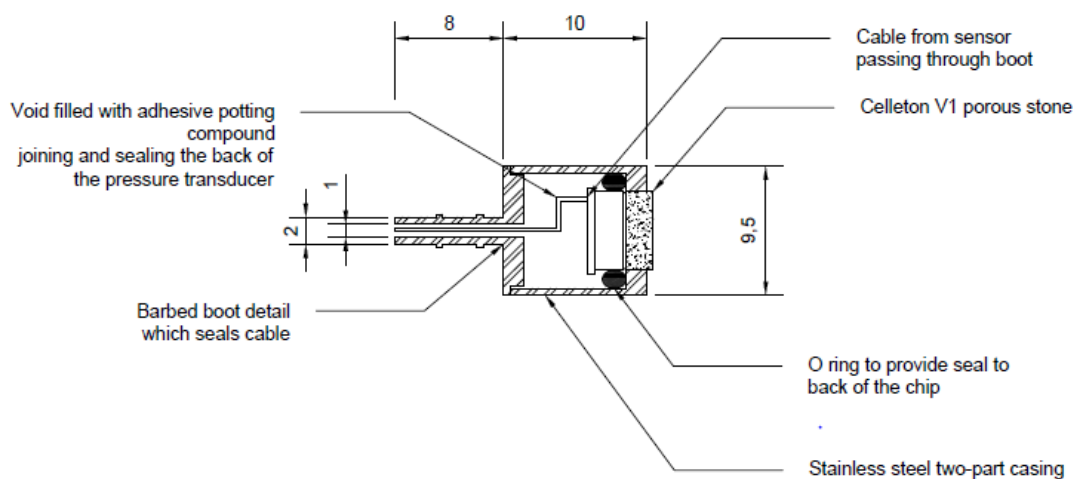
A cross section through the City, University of London Pore water pressure transducer highlighting key features, note that the dimensions shown are in millimeters.
